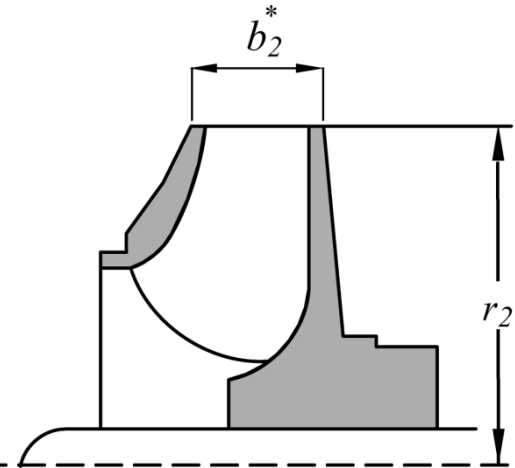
Impeller dimensions for hydraulic imbalance definition, Childs [4]
